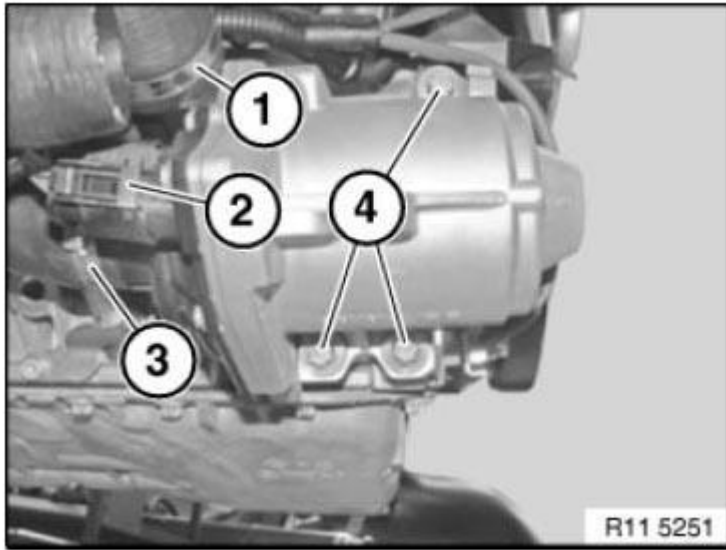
Identifying Coolant Hose With Plug Connection And Mounting Screws
